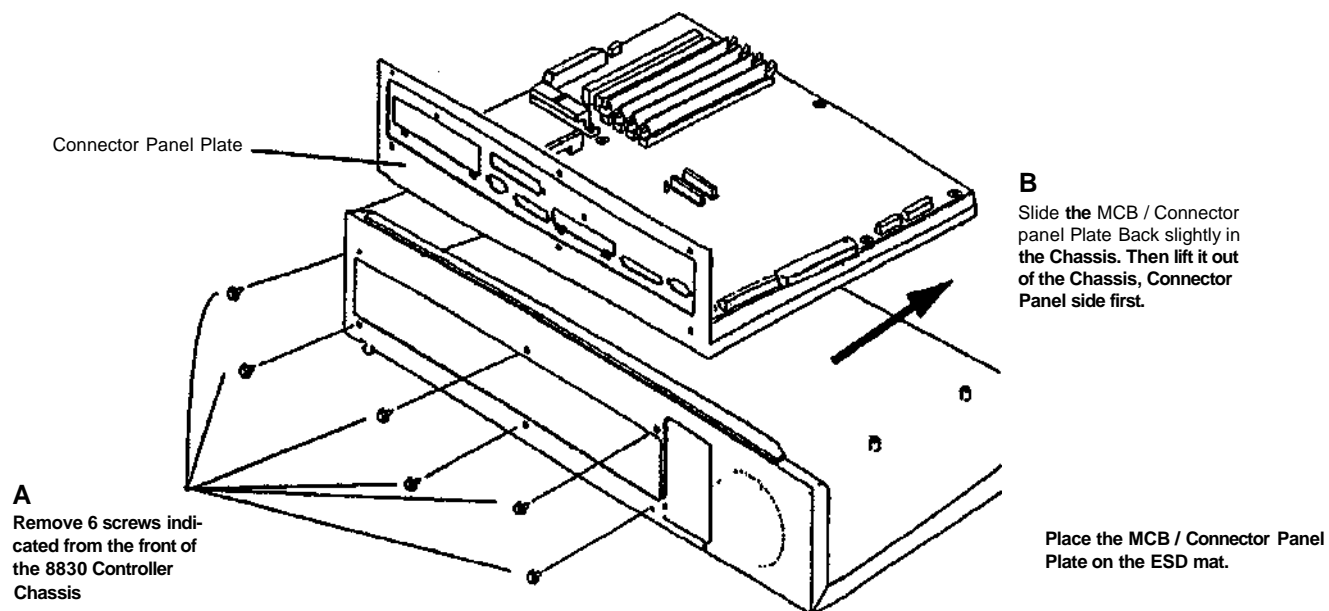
Removing the MCB and the Connector panel Plate from the 8830 Controller Chassis
